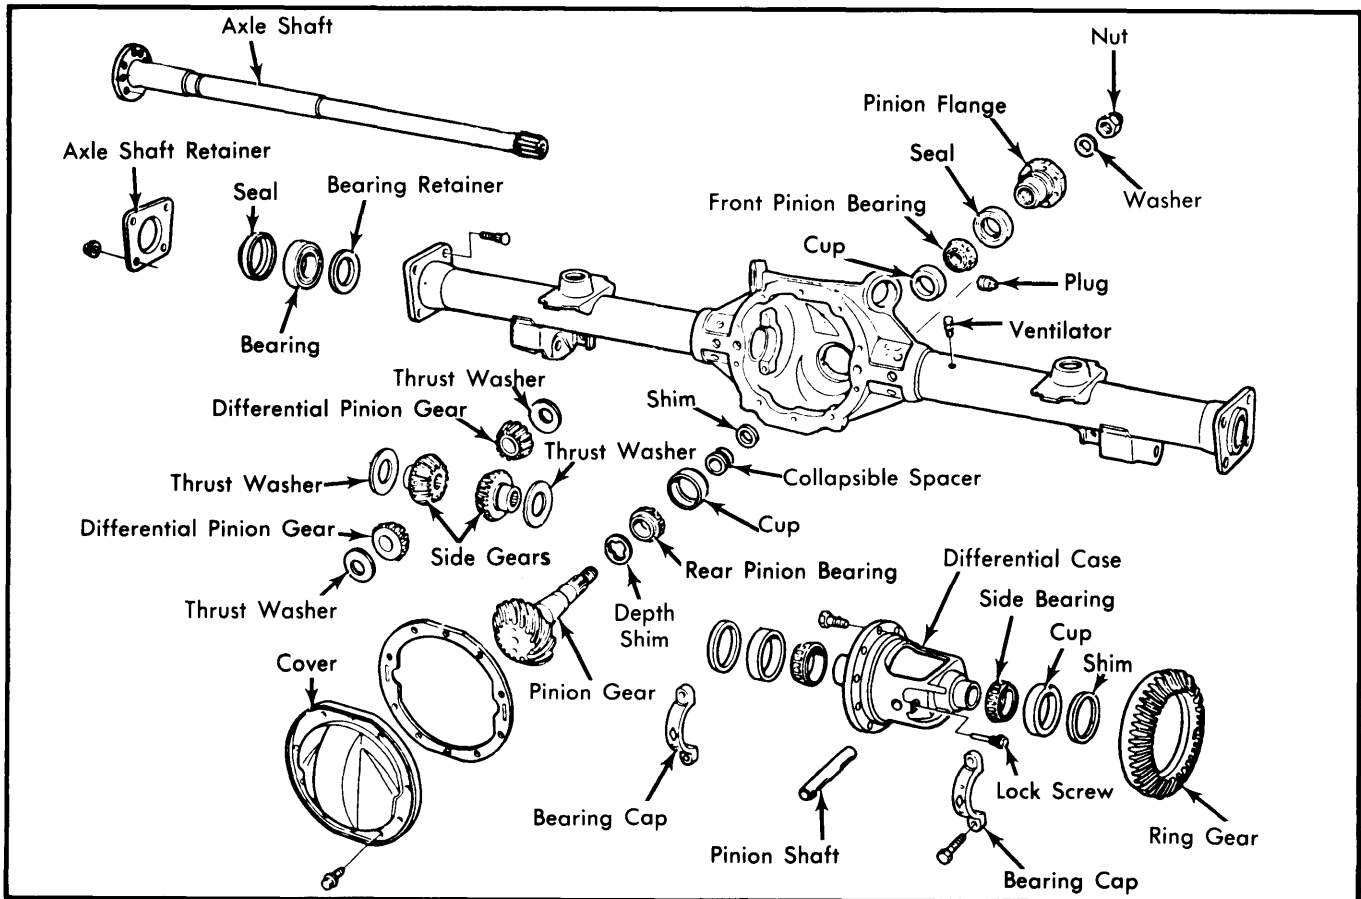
Exploded View of General Motors 8 1/2", 8 7/8" and 9 1/2" Ring Gear Axle Assembly
